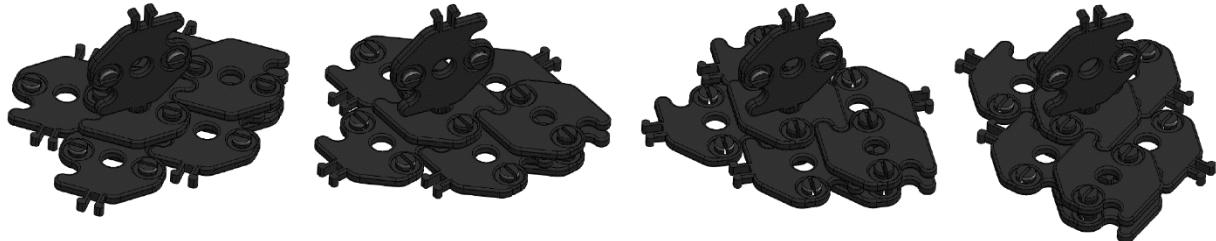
Single side snap connected to the face of a sheet which can be used as an out of plane revolute joint.
